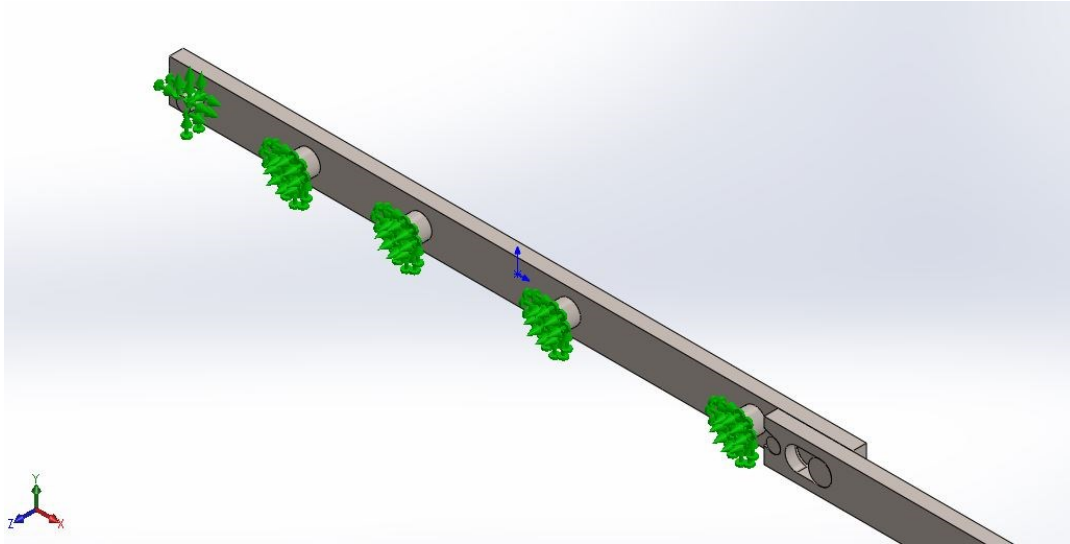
Fixed spacers on the backrest for FEA on the footrest mechanism design
